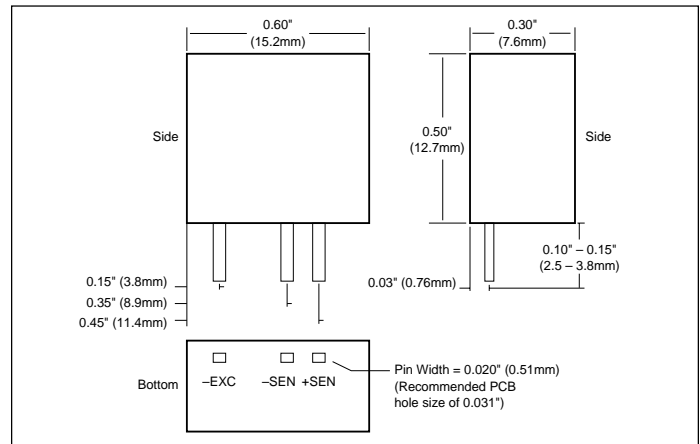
SCMXCJC Physical Dimensions And Pin Layout.
